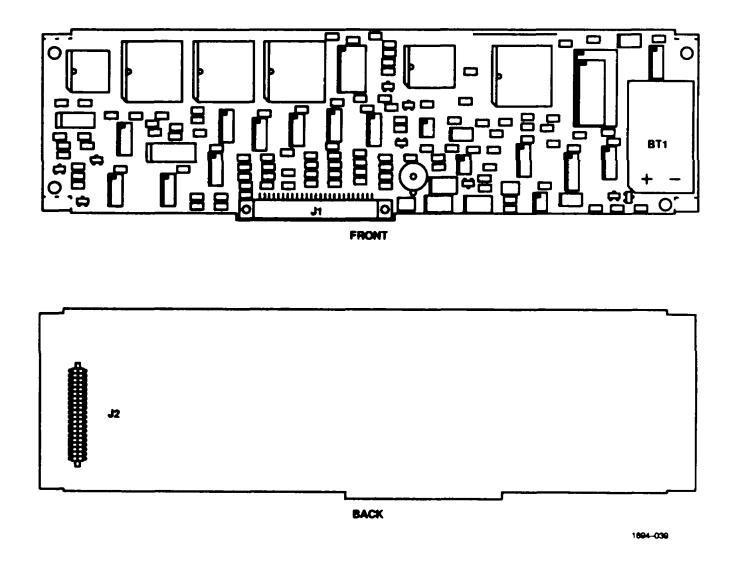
A1A1 Interface PWB Assembly Component Location Diagram (10303-2280 Rev. A)
